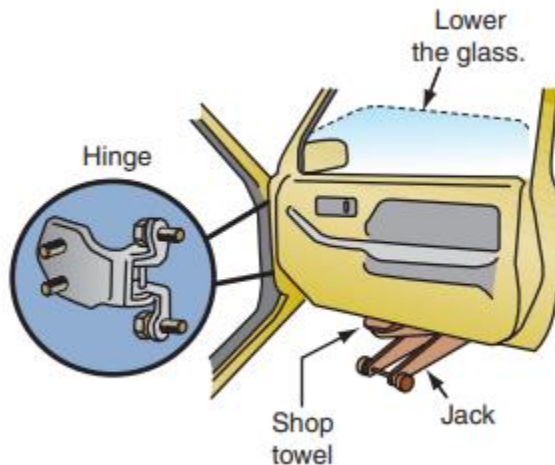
Use a floor jack to raise a door to the correct height for starting hinge bolts. The door should be level on the jack. Have someone help you hold the door on the jack.
